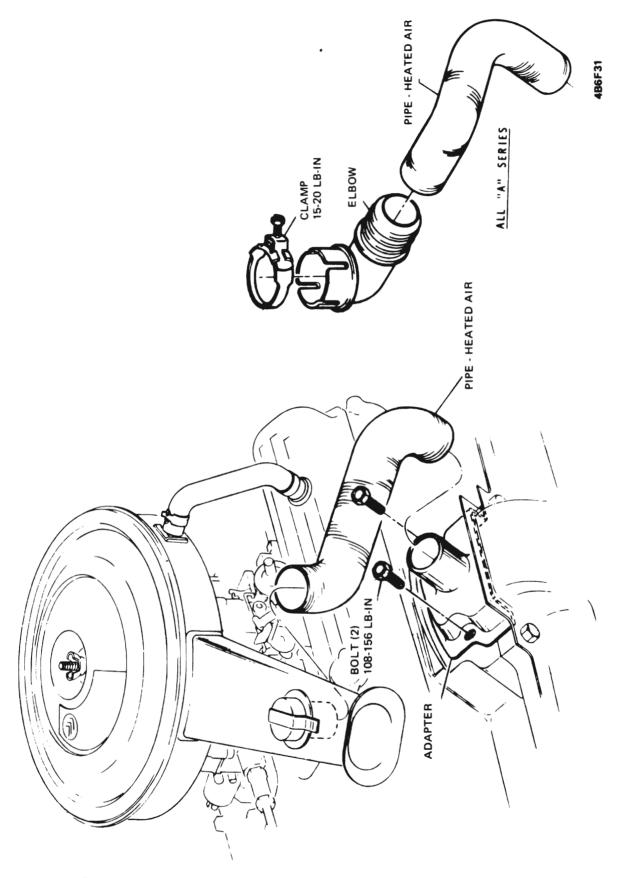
F-31 All Series Air Cleaner Mounting (V-8 Engines) without Dual Snorkel
